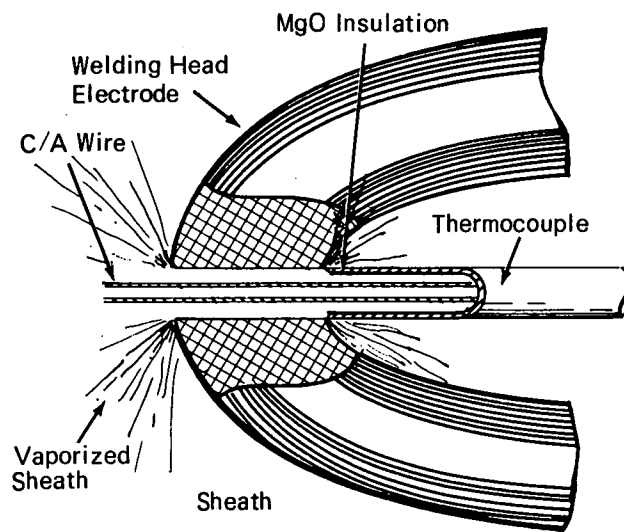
B. Close-up View of Welding Head Electrodes Vaporizing Sheath Material from Thermocouple
